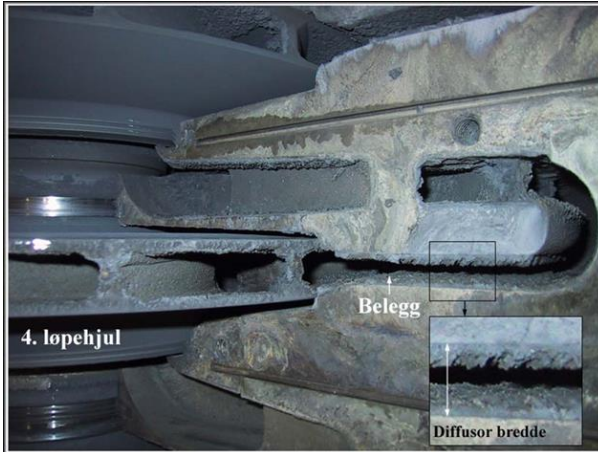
Impeller and diffuser on Åsgard compressor fouled during operation
